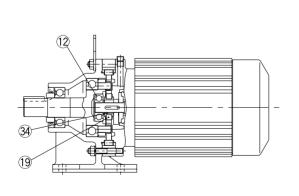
Type CNHM (Horizontal • Gearmotor) Single Reduction (Example : Frame size 6095)
